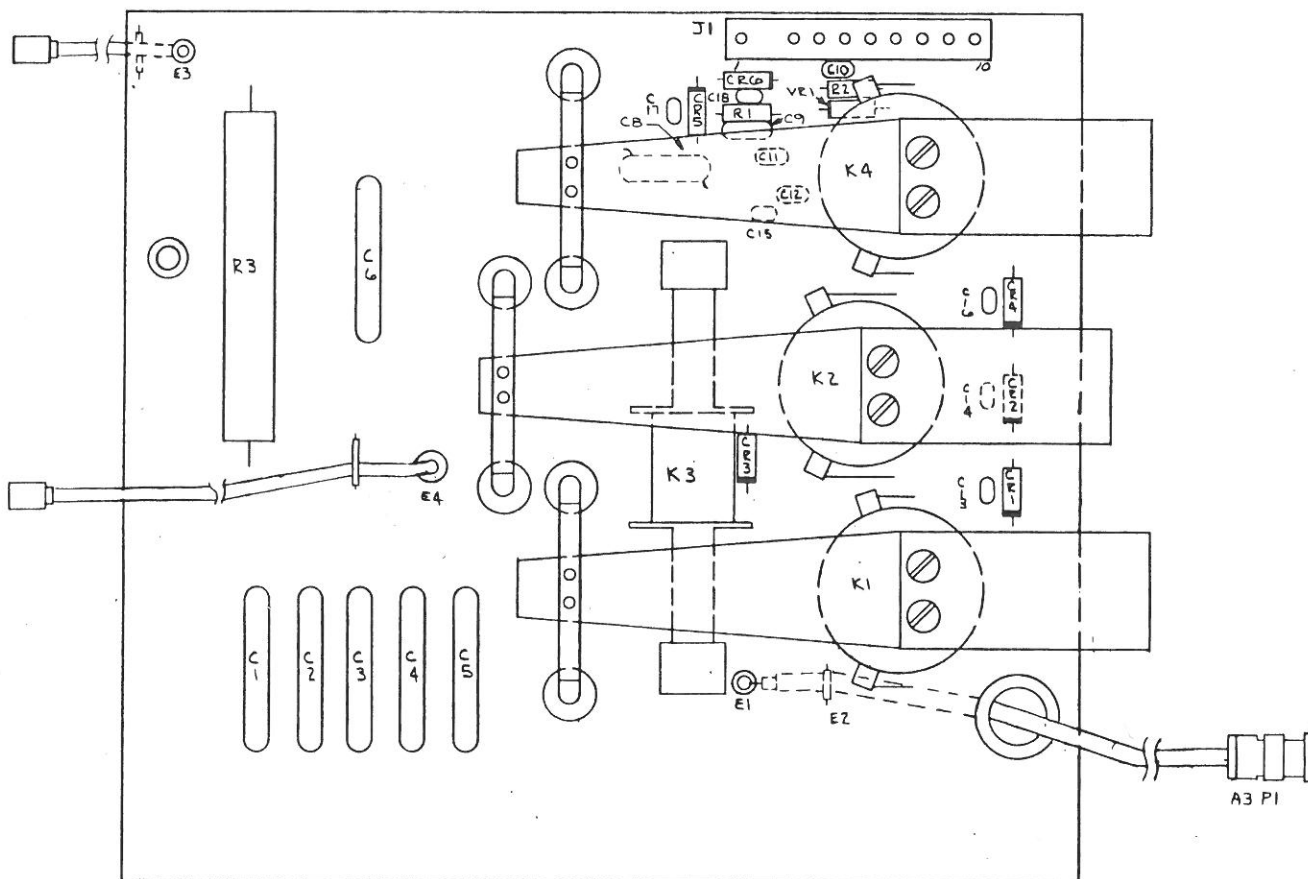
RF Output PCB Assembly A4, Component Locations
